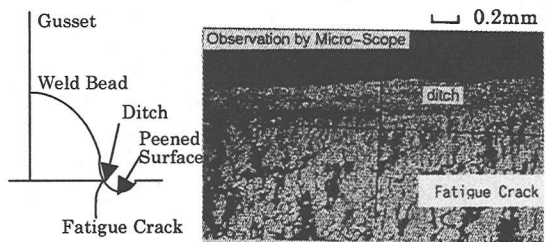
Fracture surface of 1-pass hammer peened surface near specimen surface by microscope
